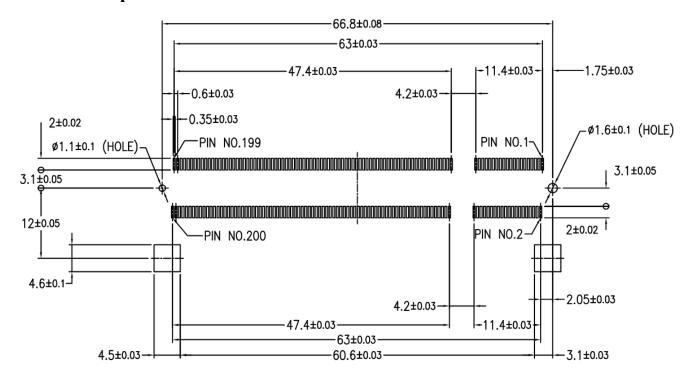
10033853-152FSLF Recommended PCB Footprint
